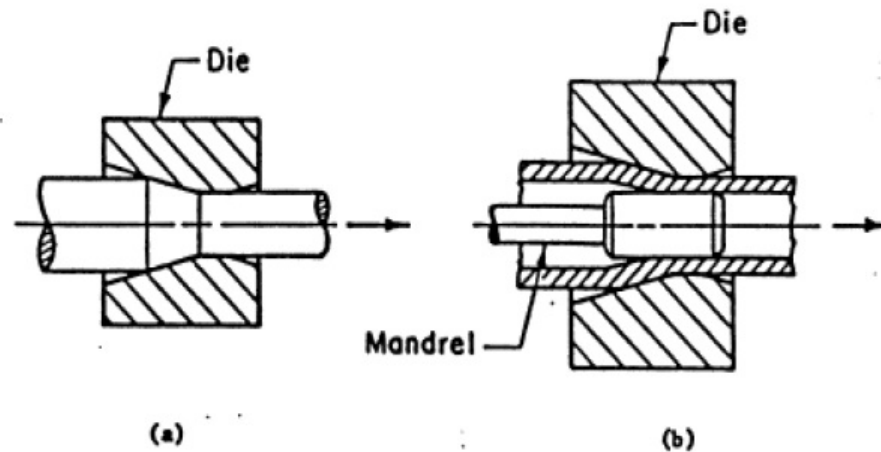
Types of Cold drawing (a) wire and bar drawing and (b) Tube drawing [14]
